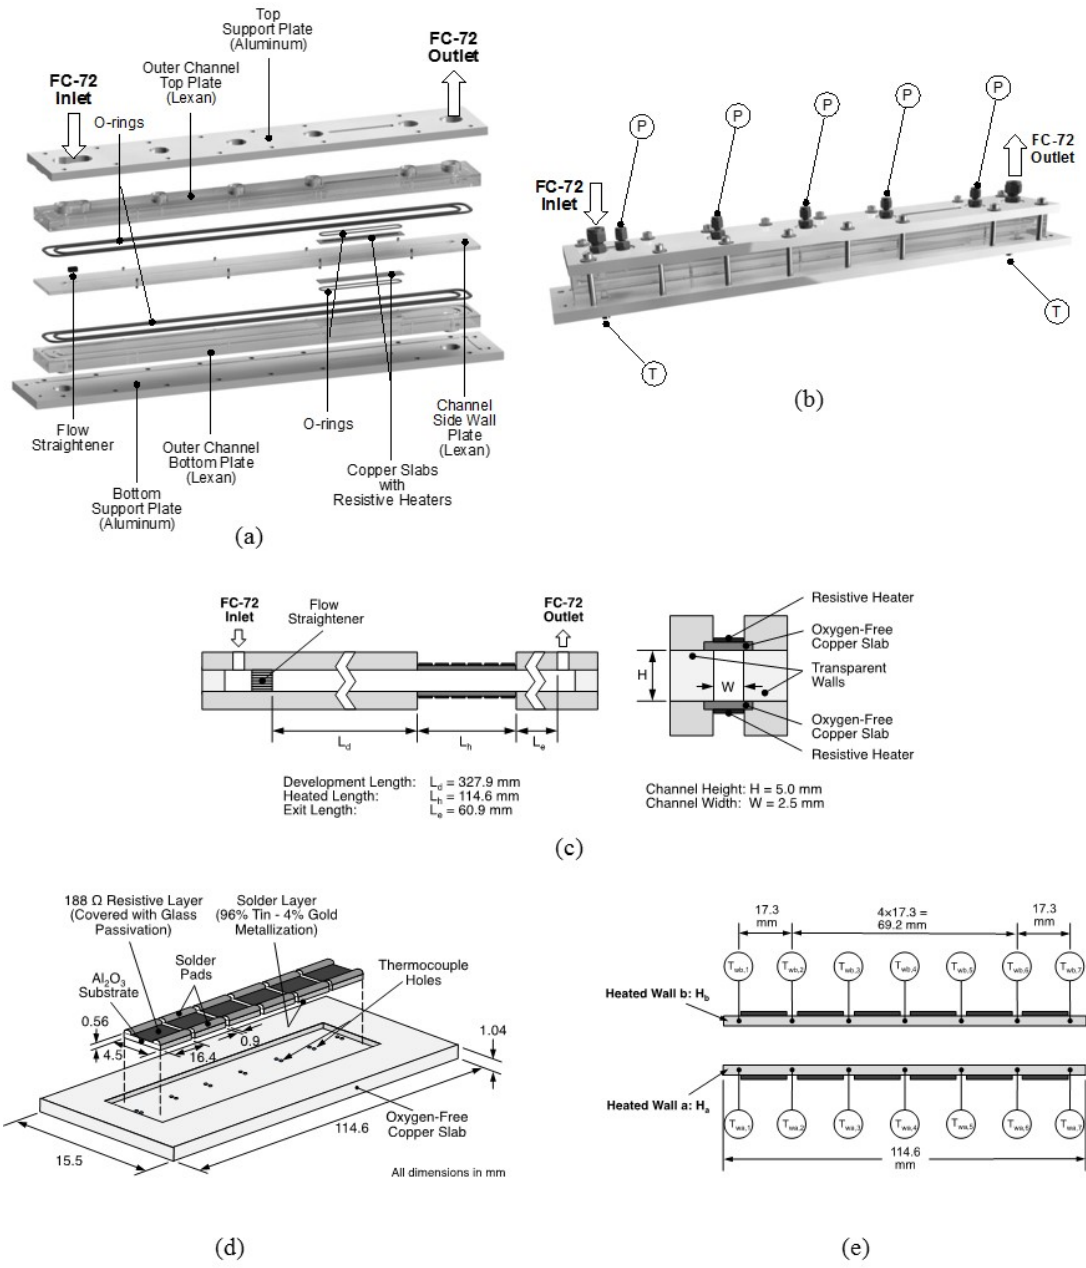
(a) Exploded view of flow boiling module. (b) Assembled view of flow boiling module. (c) Key dimensions of flow channel. (d) Construction of heated walls and thick-film resistors. (e) Thermocouple layout in two heated walls.
